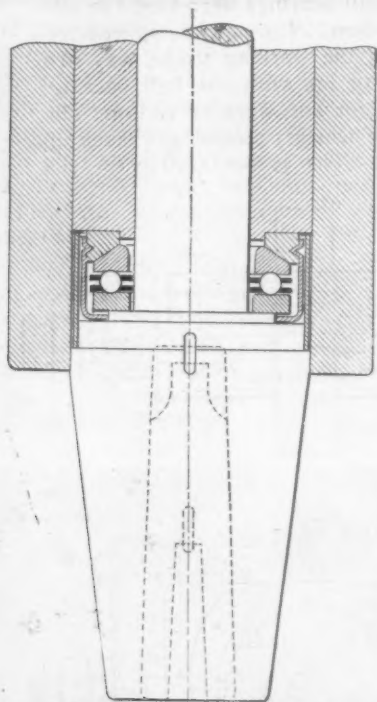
Ball Bearing of the Unit Type for a Drill Press Spindle Made by the Hess-Bright Mfg. Company, Philadelphia, Pa.
